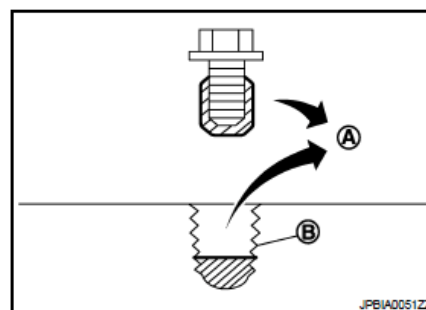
Removing Old Liquid Gasket From Bolt Hole And Thread
